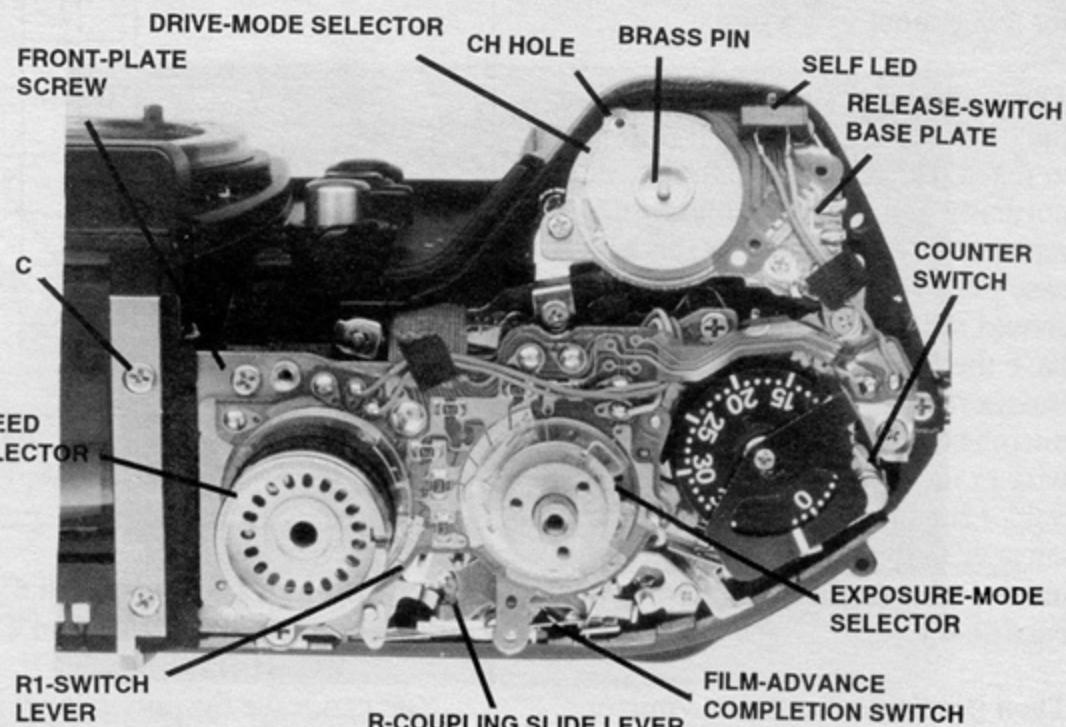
RELEASE-SIDE TOP COVER REMOVED
